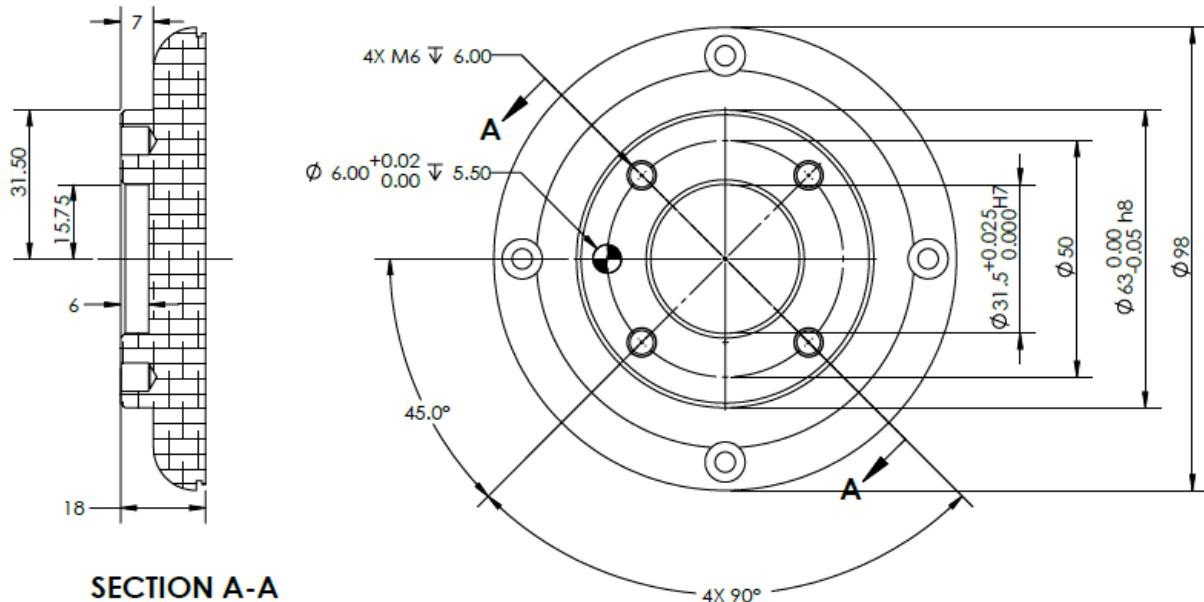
End effector mounting plate of the Rizon 4 robotic manipulator.
